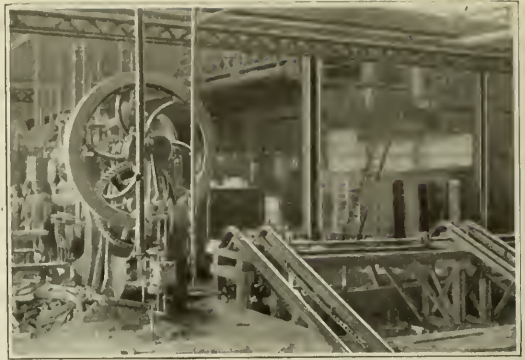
A special conveyor is built by the Chain Belt Co., Milwaukee, Wis., for the rapid handling of bars in the Milwaukee works of the Illinois Steel Co. The chain conveyors carry the work up inclined rails, where it is in position to be fed into power shears, which are used for trimming the ends. Such an arrangement avoids handling the work by manual labor
